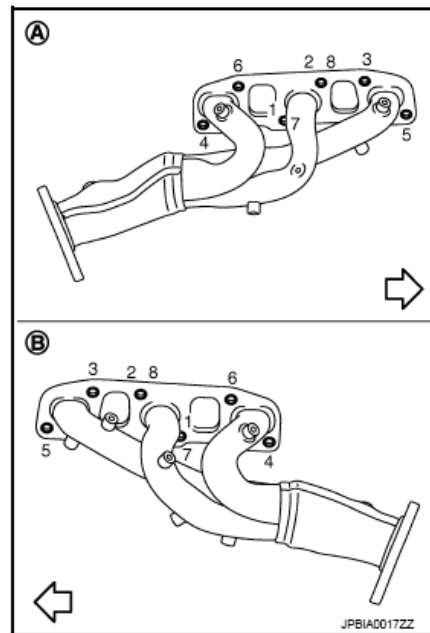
Identifying Exhaust Manifold Mounting Bolts Tightening Sequence
